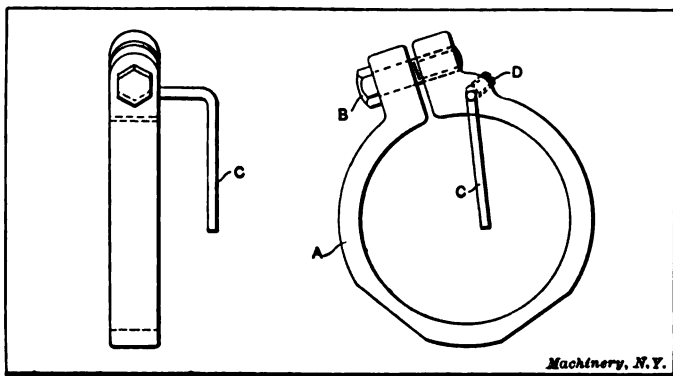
Ejector used in Connection with the Shaving-tool Holder shown in Fig. 31
